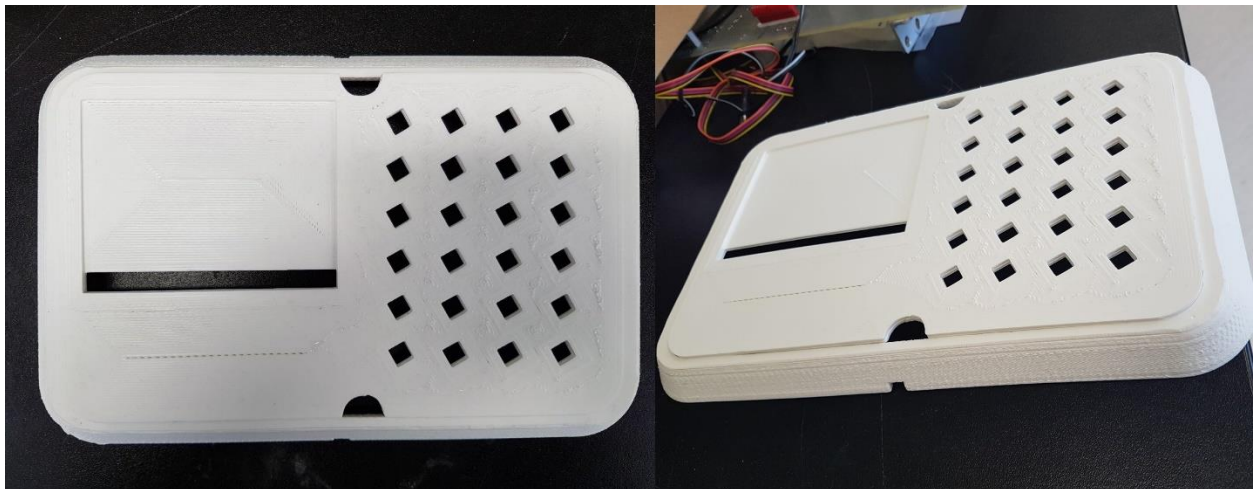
The first version of designed and 3D printed model of the lid. This is the first model of the designed lid. These parts were printed in the 3D printing facility of Medical Physics department at University of Manitoba due to their large size. They are made of ABS plastics. In the first design, the water bottle was considered to be located inside the main cage's frame. A capacitive touch screen LCD was considered to be located on the lid as user interface.
